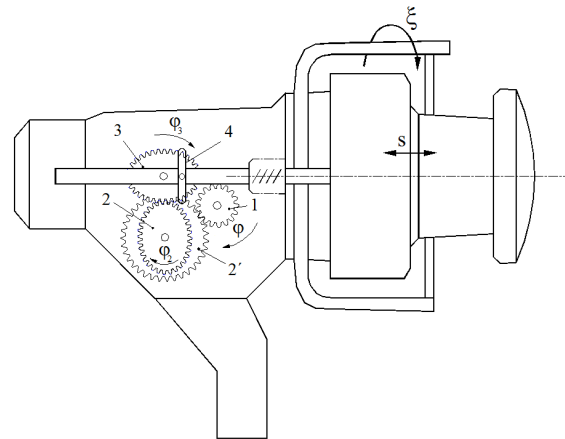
Design of the fishing reel spool mechanism using noncircular gear mechanism in series with a scotch-yoke
